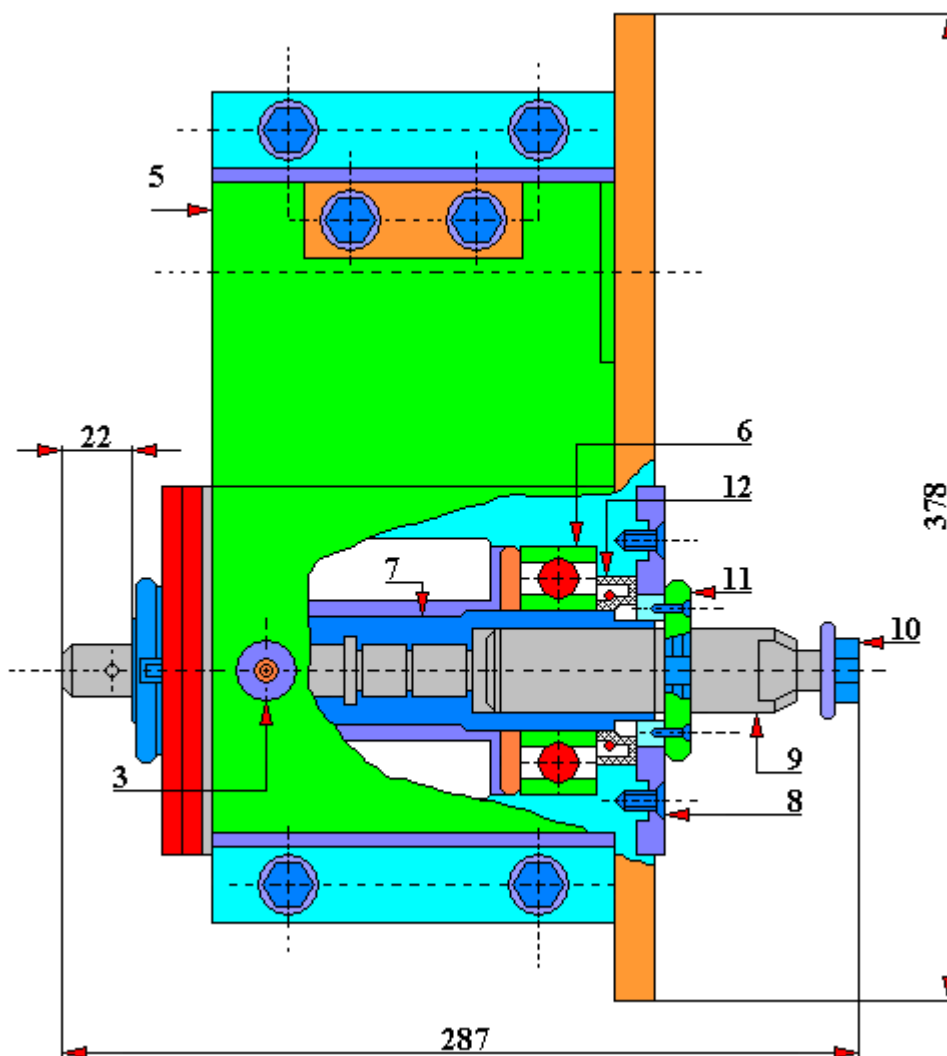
Top view with a partial section of the headstock of the lower sample of the CML-2 (SMC-2) tribotester
